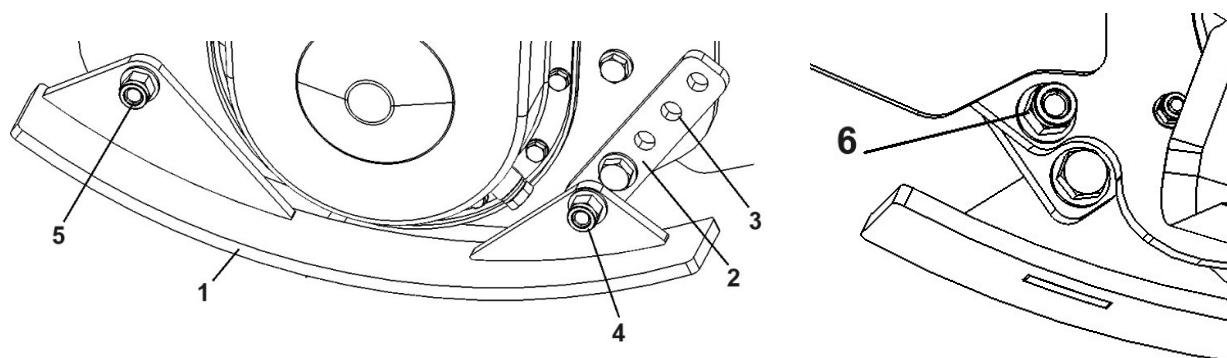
Adjustment of Working Depth: 1 – skid, 2 – adjustment bar, 3 – adjustment holes, 4 – nut “A”, 5 – nut “B”, 6 – nut “C”.
